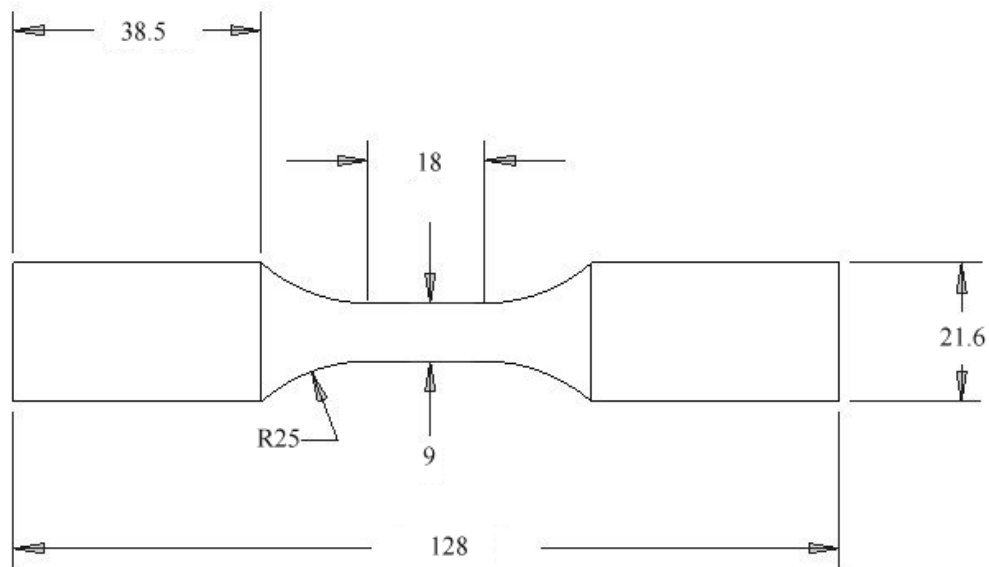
Cylindrical Test Specimen with Dimensions in mm
